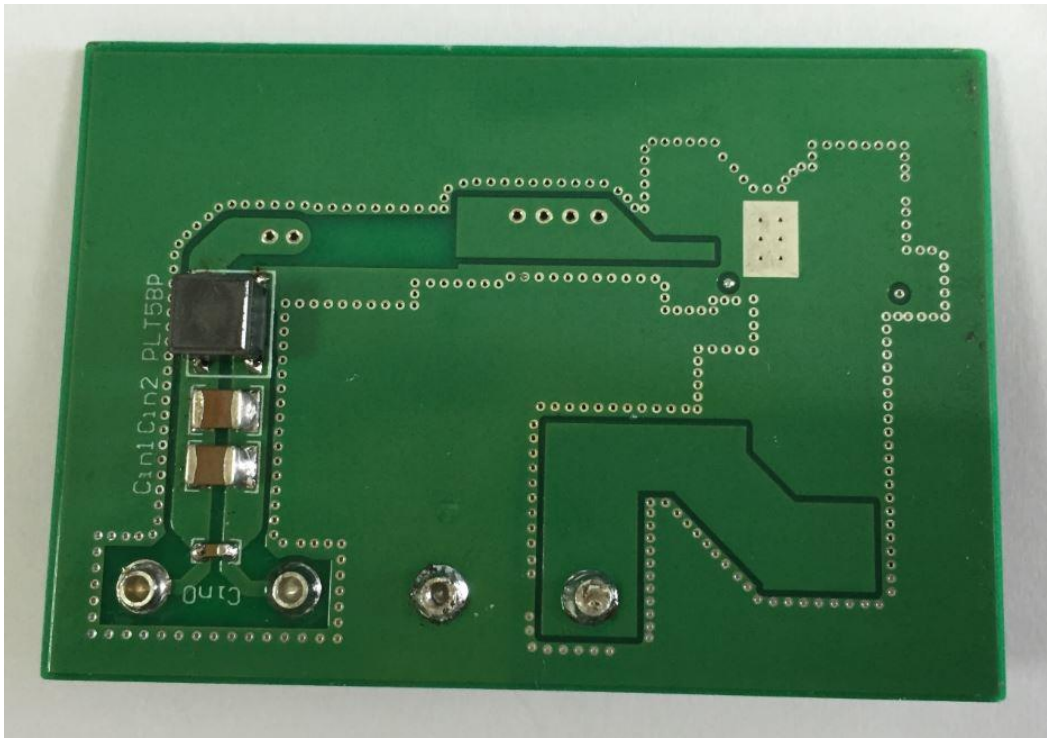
Reference Design Board Bottom View (61x42mm<sup>2</sup>)
